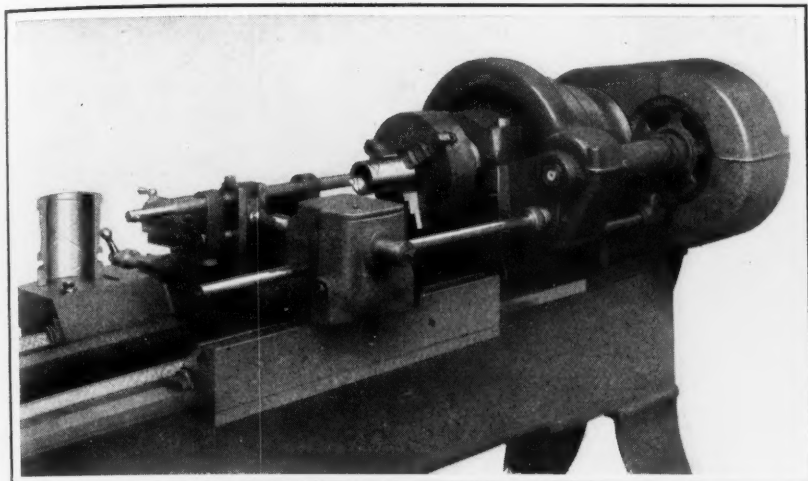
Mueller Lathe Attachment for cutting Oil-grooves in Bearings or Shafts
